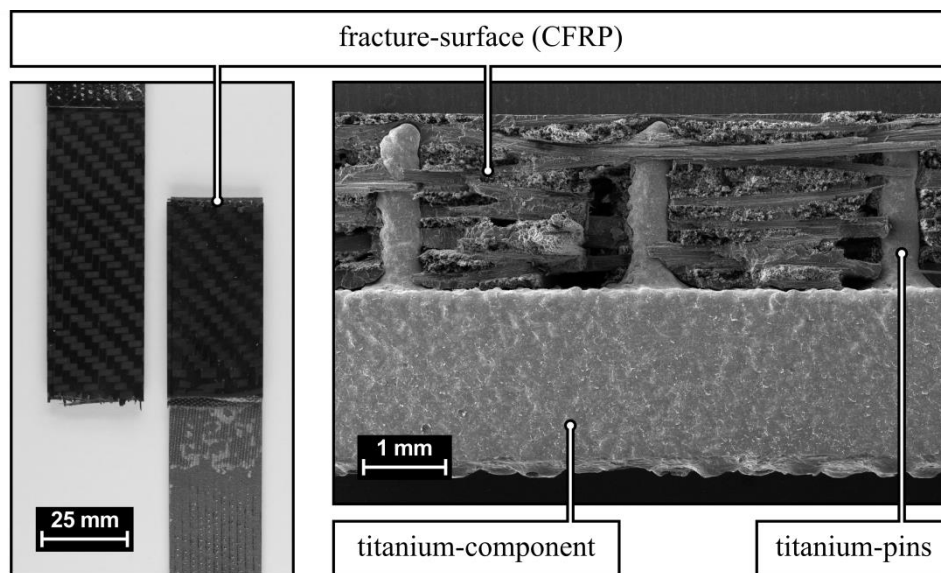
Fracture surface analysis of specimens with pin length 2.0 mm.
